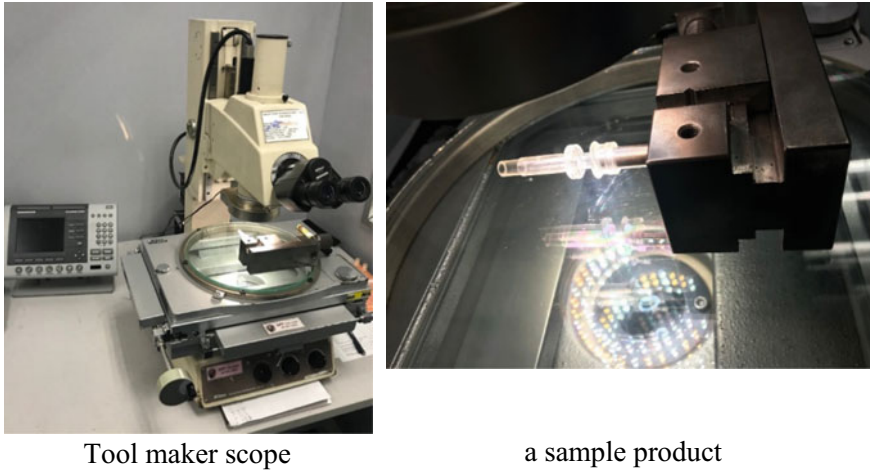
shows a tool maker microscope and a jig holding a sample product. The samples were measured using a tool maker microscope (TMS) to identify the distance of bend and gate flash height. Ideally, the warpage should be within  $7.05 \pm 0.25$  mm and the gate flash should not exceed 0.40 mm. The injection moulding process was operated in a controlled clean room environment. The machine was equipped with a special filtration unit to remove particulate matter. It was particularly important to consistently monitor the temperature and humidity in the clean room for this moulding process.
